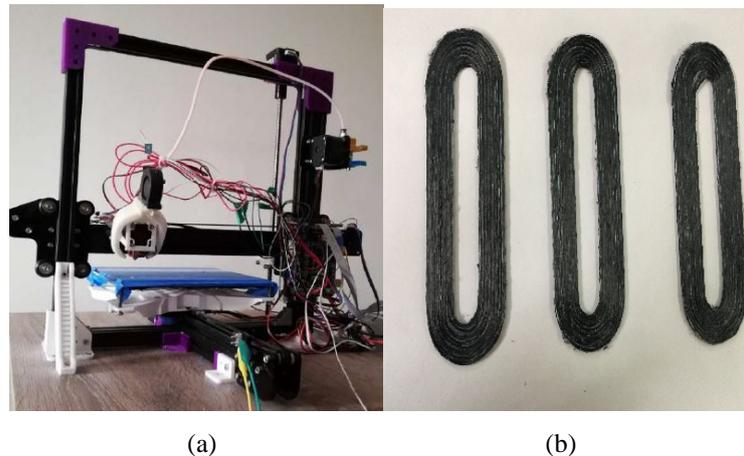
Additive manufacturing of CFRTP samples; a) Custom 3D printer and b) Bending Test Specimens
